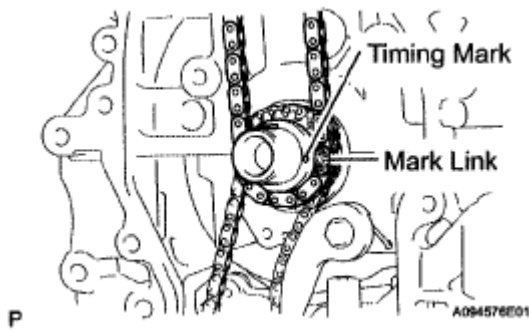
Identifying Crankshaft Timing Mark And Mark Link
